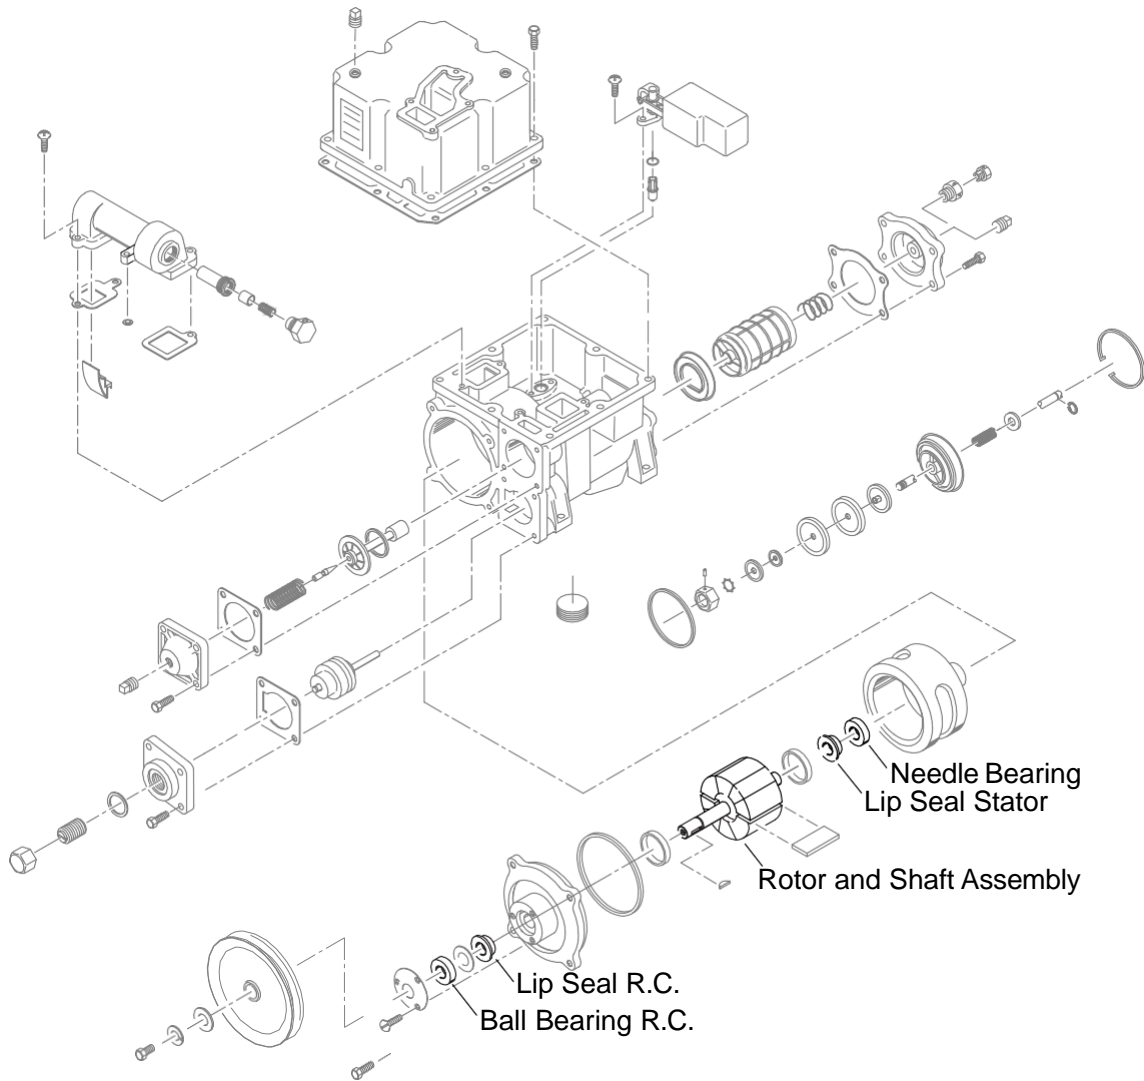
4G04796 Kit Rotor & Bearing Rebuild T140 100mm
